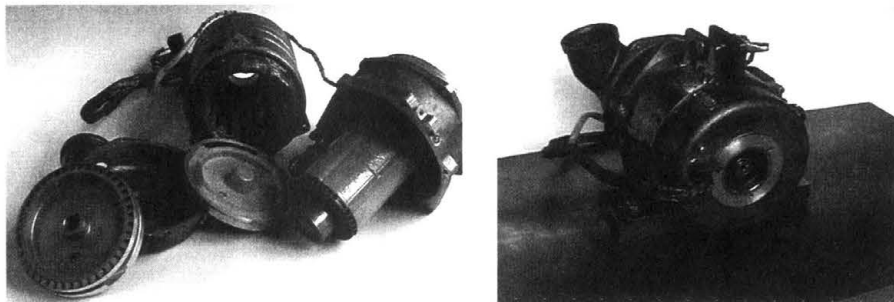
View of assembled turbine generator (right) and its components (left).
